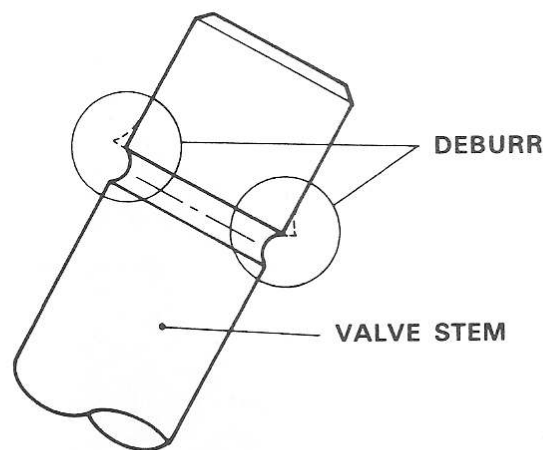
B.11 If the valve binds in the guide, deburr the area above the keeper groove (Sec 9)
